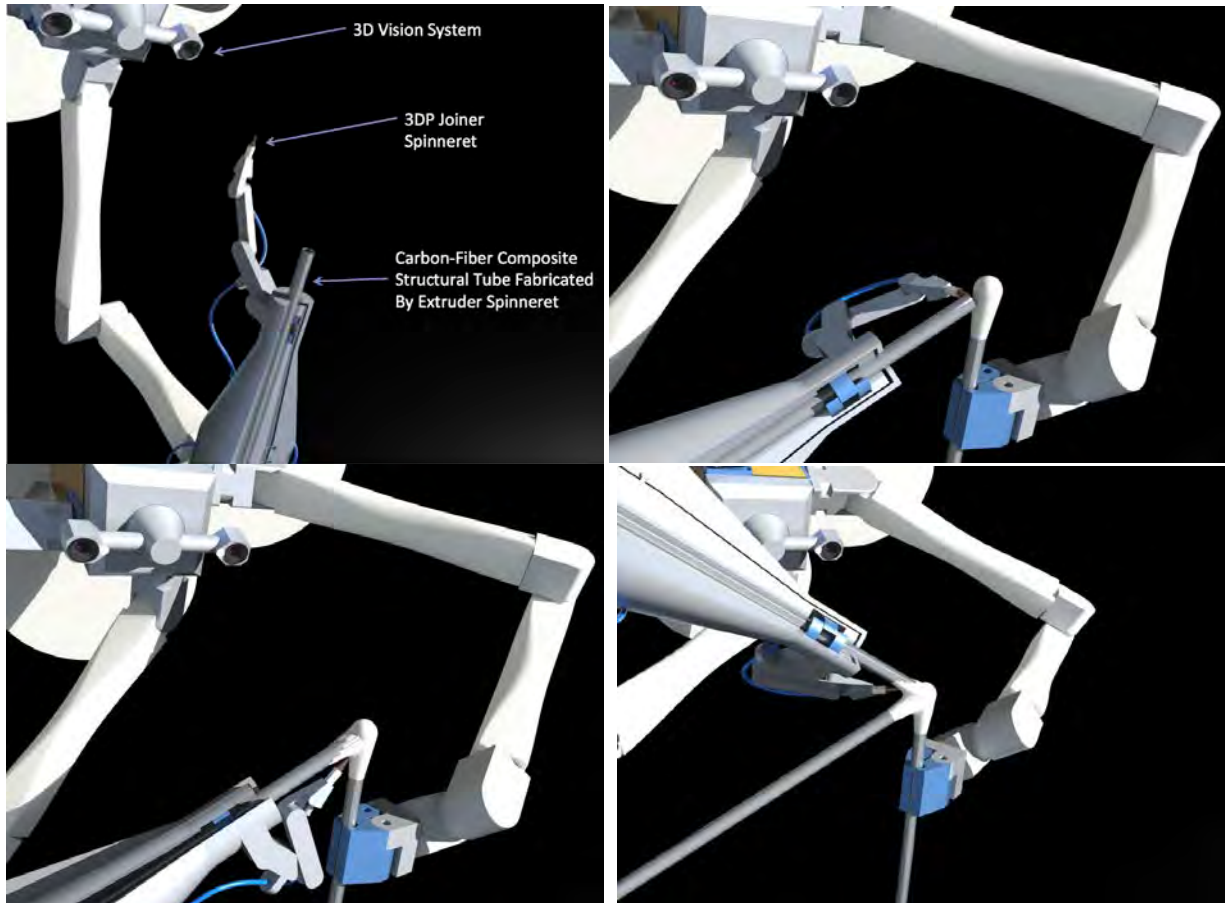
Conceptual Tube-Joining Process Using Fused Filament Fabrication. *The SpiderFab Bot uses a molten-material feed head on the joining tool to fashion a joint between the element and the existing structure.
